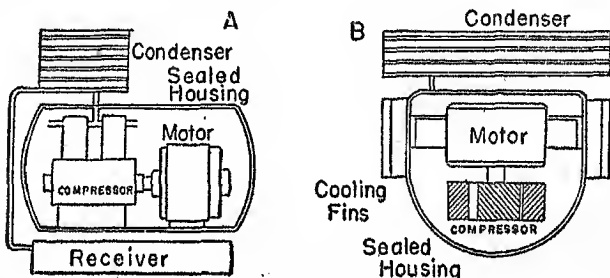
Sealed or Hermetic Units Have Compressor and Motor within a Gas-tight Housing.
